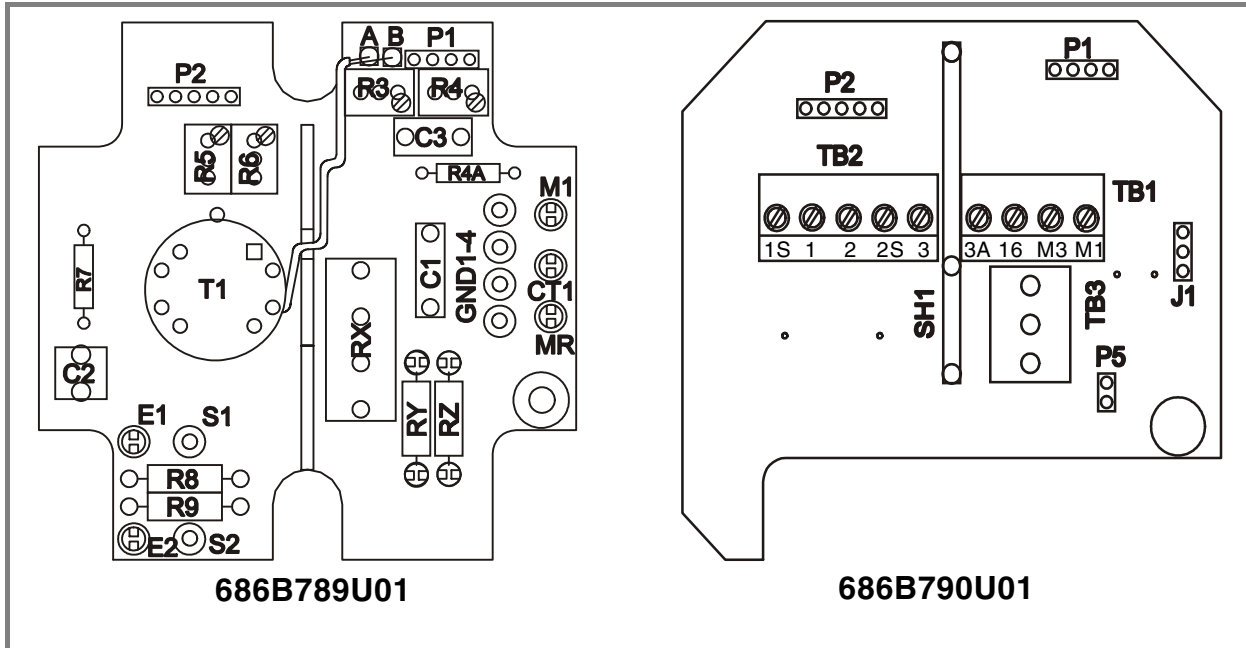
10D1475J REMOTE PRIMARY PCB ASSEMBLIES
